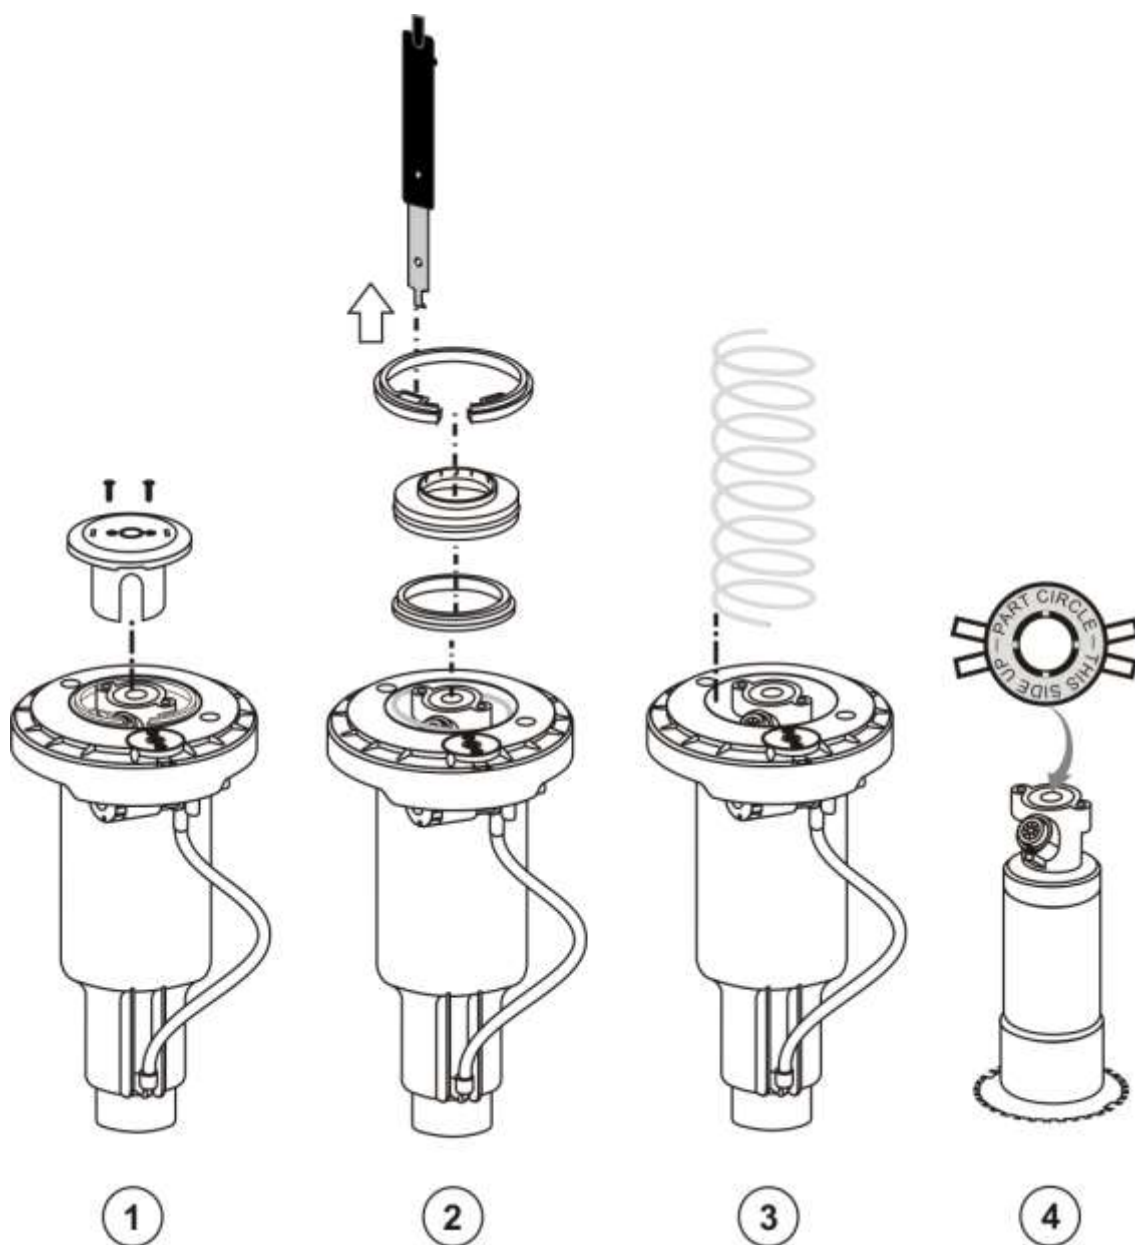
Procedures to Remove Nozzle Cap, Snap Ring/Retainers, Retract Spring and Riser Unit.
